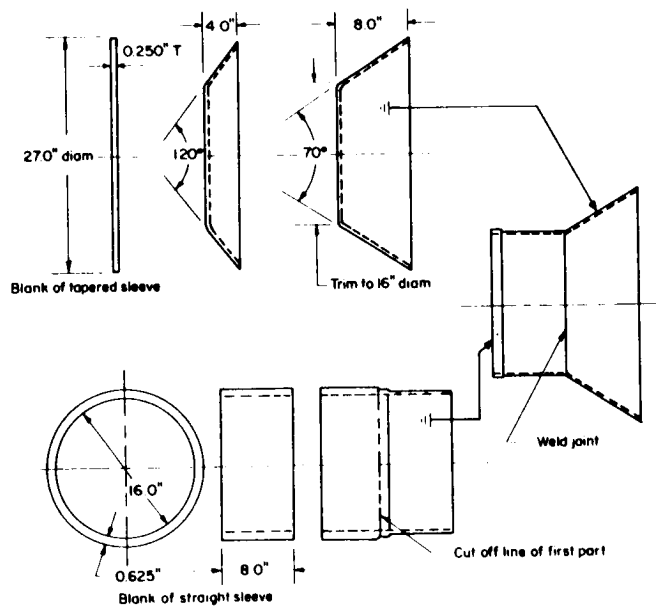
SHEAR FORMING OF A CONE AND TUBE MADE OF STEEL FOR A FINAL SHEAR-FORMING OPERATION SHOWN IN FIGURE (REF. 59)
